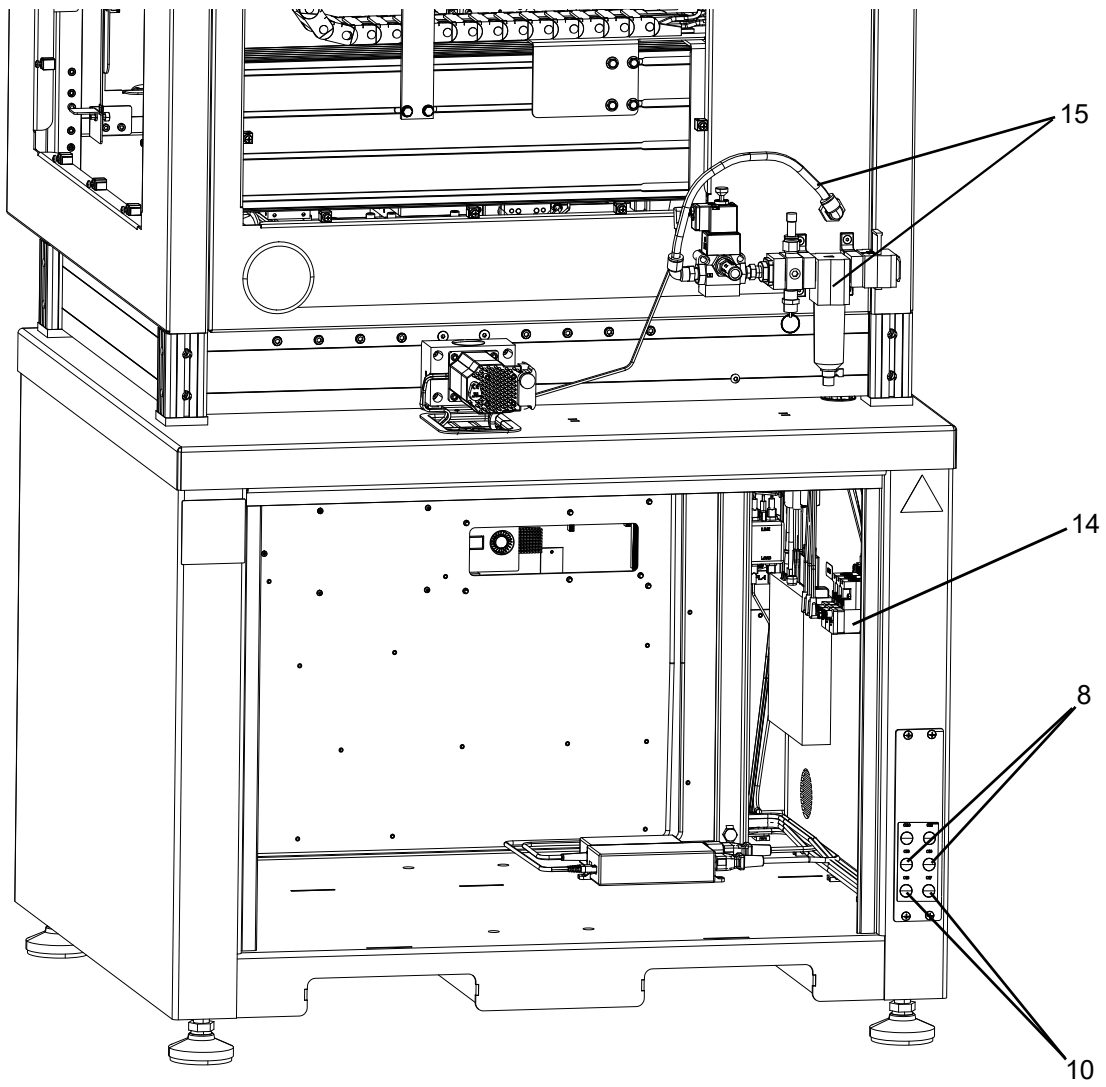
C-300 and C-500 System Parts 3 (Rear View)
